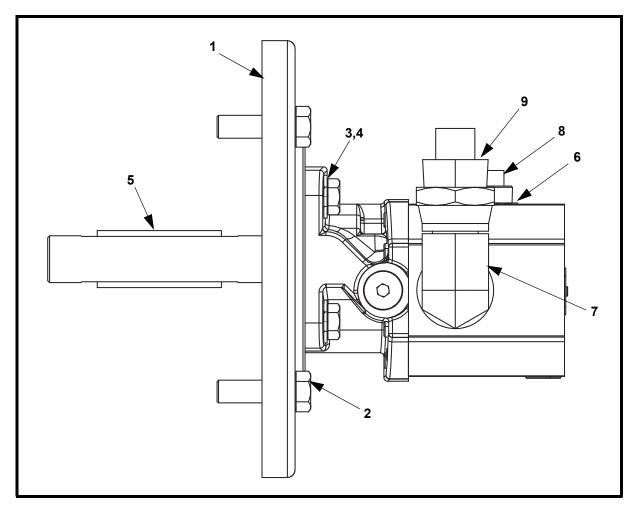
8HA Hydraulic Motor Assembly, P/N 12965
